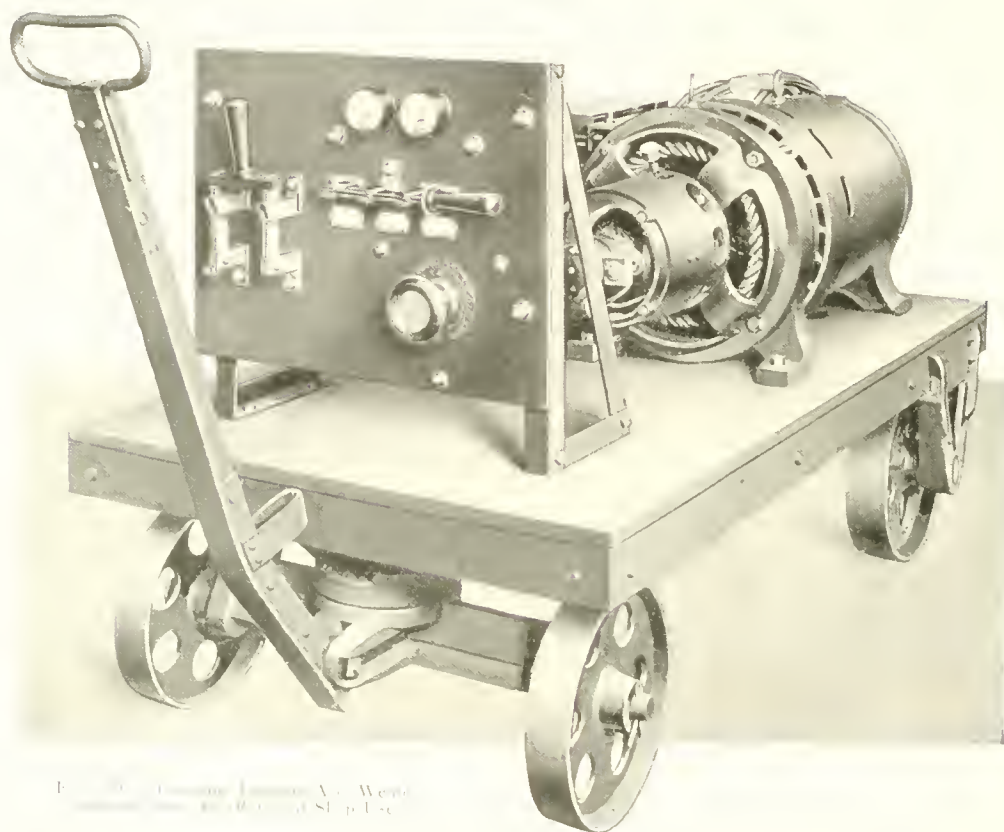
Lincoln Arc Welder for Railroad Shop Use
